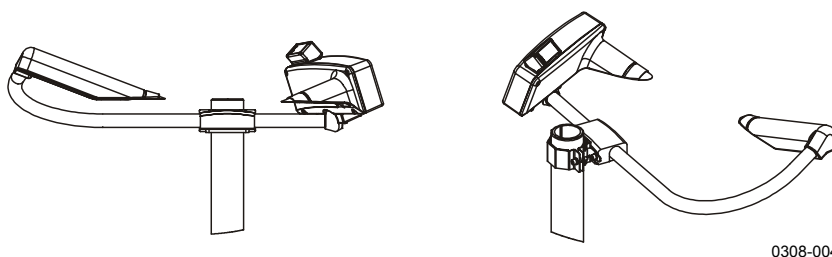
Installing the Subassembly to the Mast with the Vaisala Clamp Assembly
